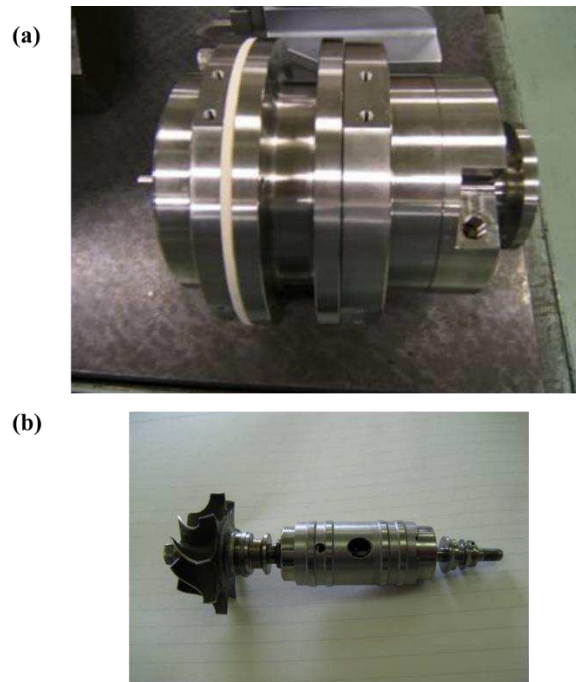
The outlook of (a) test turbine and (b) impeller.
